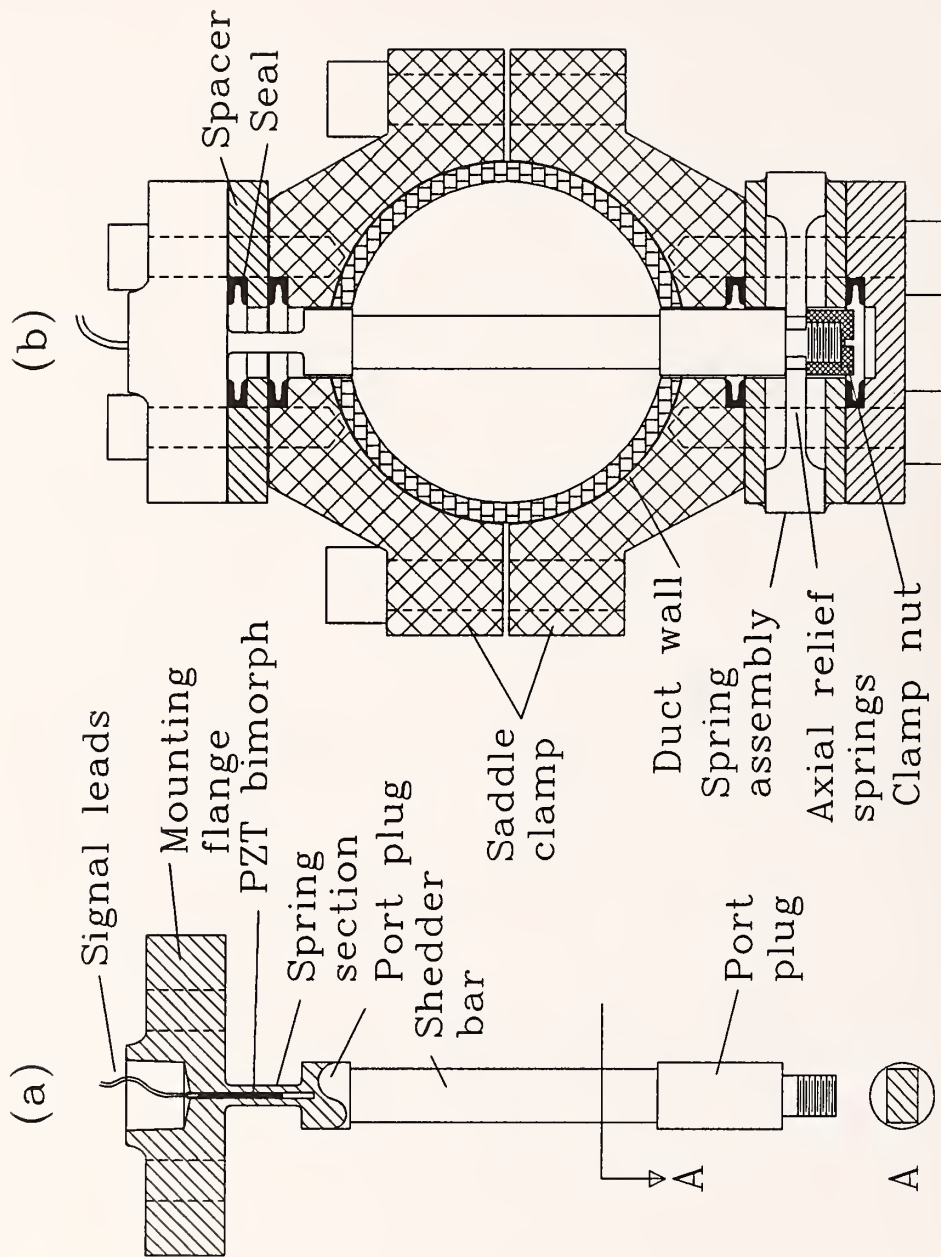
a. Scale drawing of the 93-4-1 flowmeter assembly.
